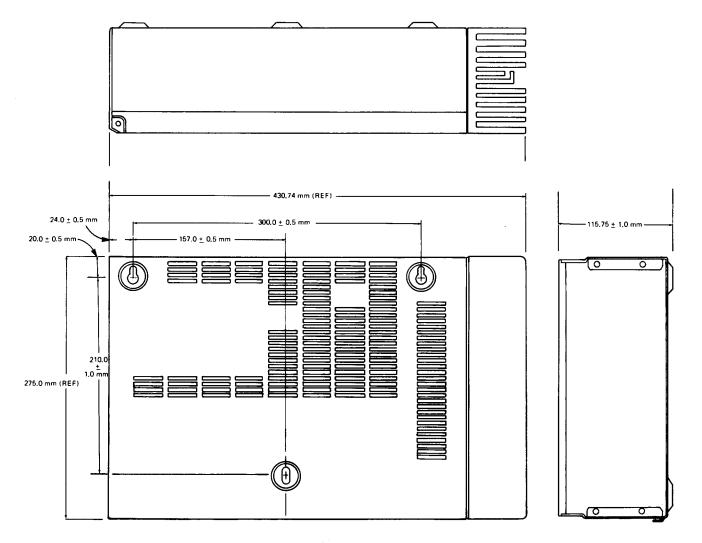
MC compact Mounting Dimensional Detail (Bottom View)
